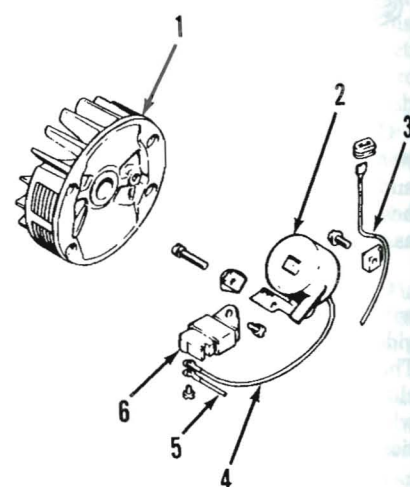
Exploded view of transistor ignition system used on Models 015AVE and 015LE.
